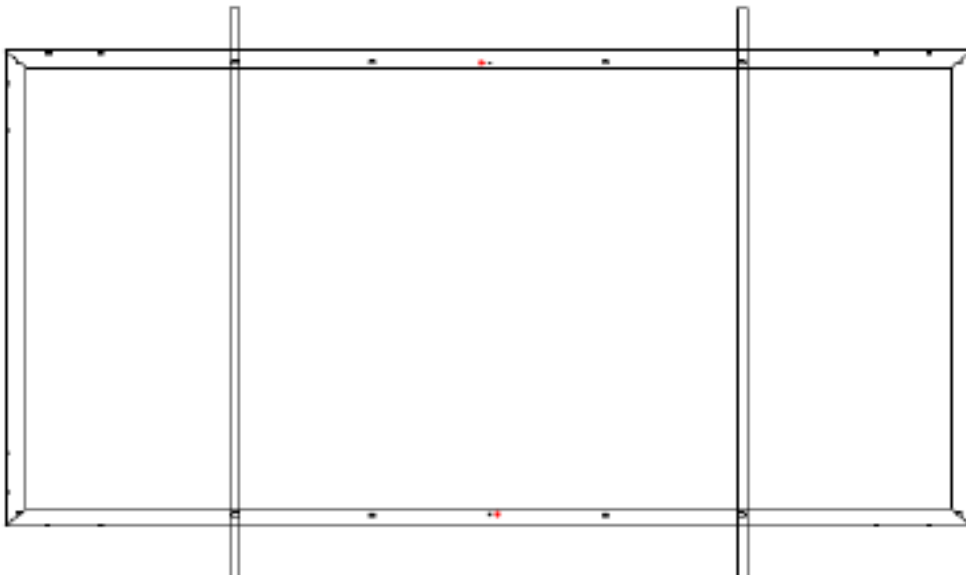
(4 mounting hole installation is compatible with frames featuring 4 mounting holes.)
